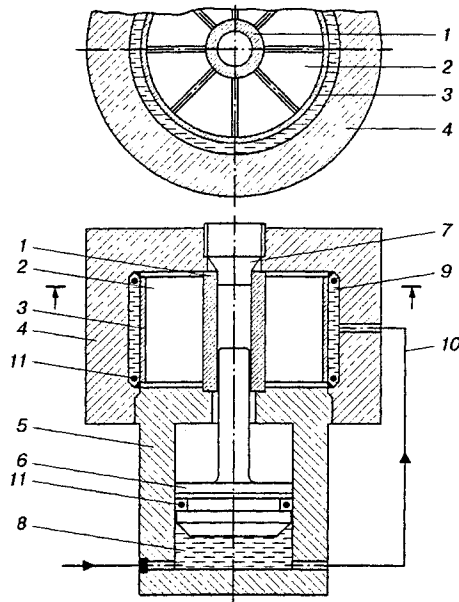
Layout of a multiplier with hydromechanical support: *top figure*: cross section marked by arrows in the bottom figure; *bottom figure* (longitudinal section): 1) internal cylinder; 2) segmented cylinder; 3) thin shell; 4) cage; 5) large cylinder; 6) multiplier piston; 7) nozzle plug; 8) cavity of the large cylinder of the multiplier; 9) cavity of external compression; 10) connecting channel; 11) seals.
